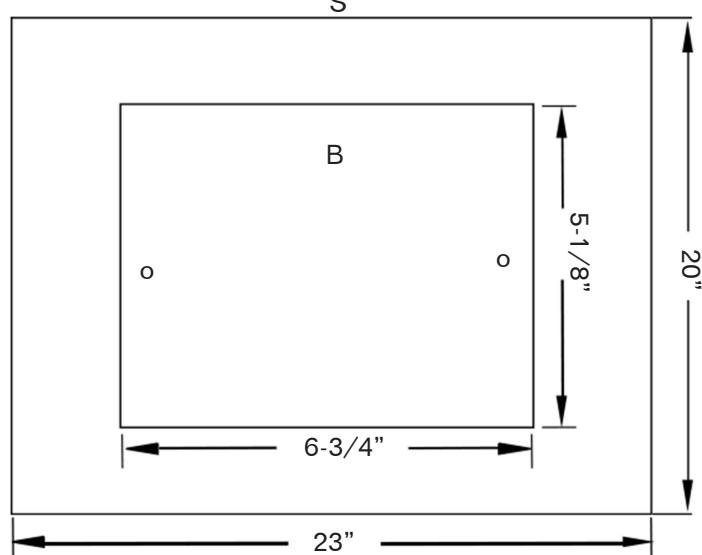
Shows Sander's Base Dimension (B), Required Space (S), and Mounting Holes (o)
